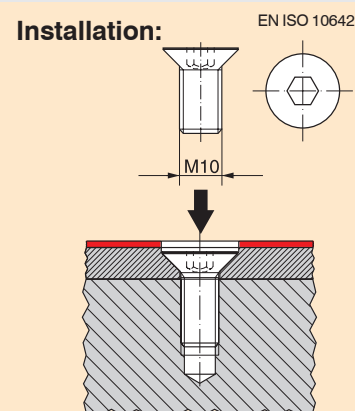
Fastening deva.bm® sliding strips with hexagon socket countersunk head screws
